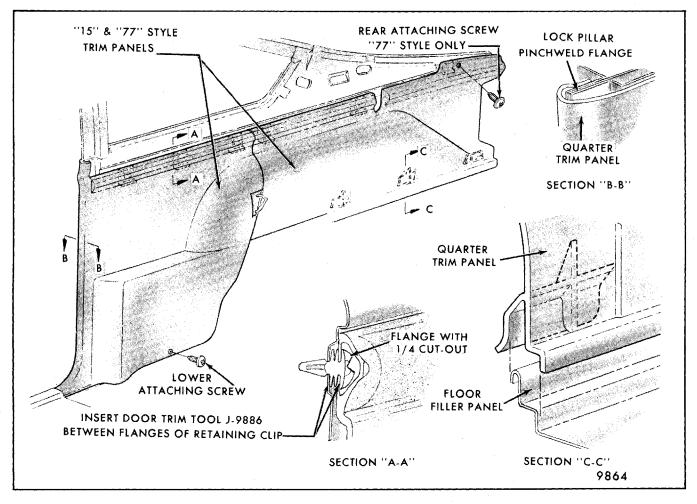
H-15 and 77 Quarter Trim Assembly (H-07 Similar)
